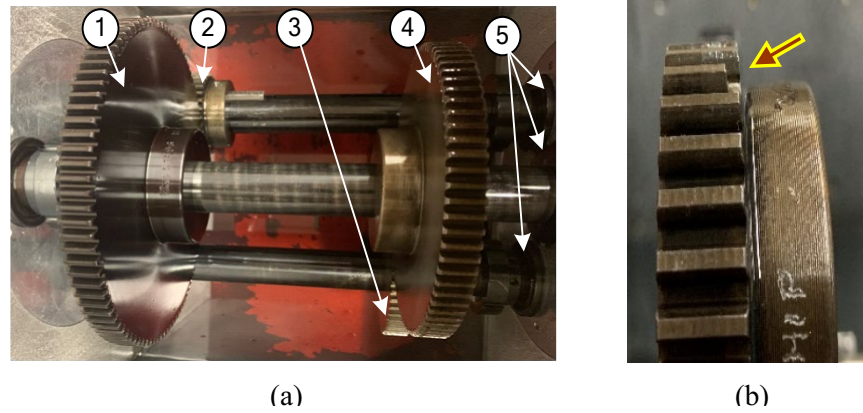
(a) A two-stage gear system: (1) input gear; (2) input pinion; (3) output pinion; (4) output gear (5) the roller bearings. (b) A simulated damaged gear with one partially broken tooth (chipped gear).
